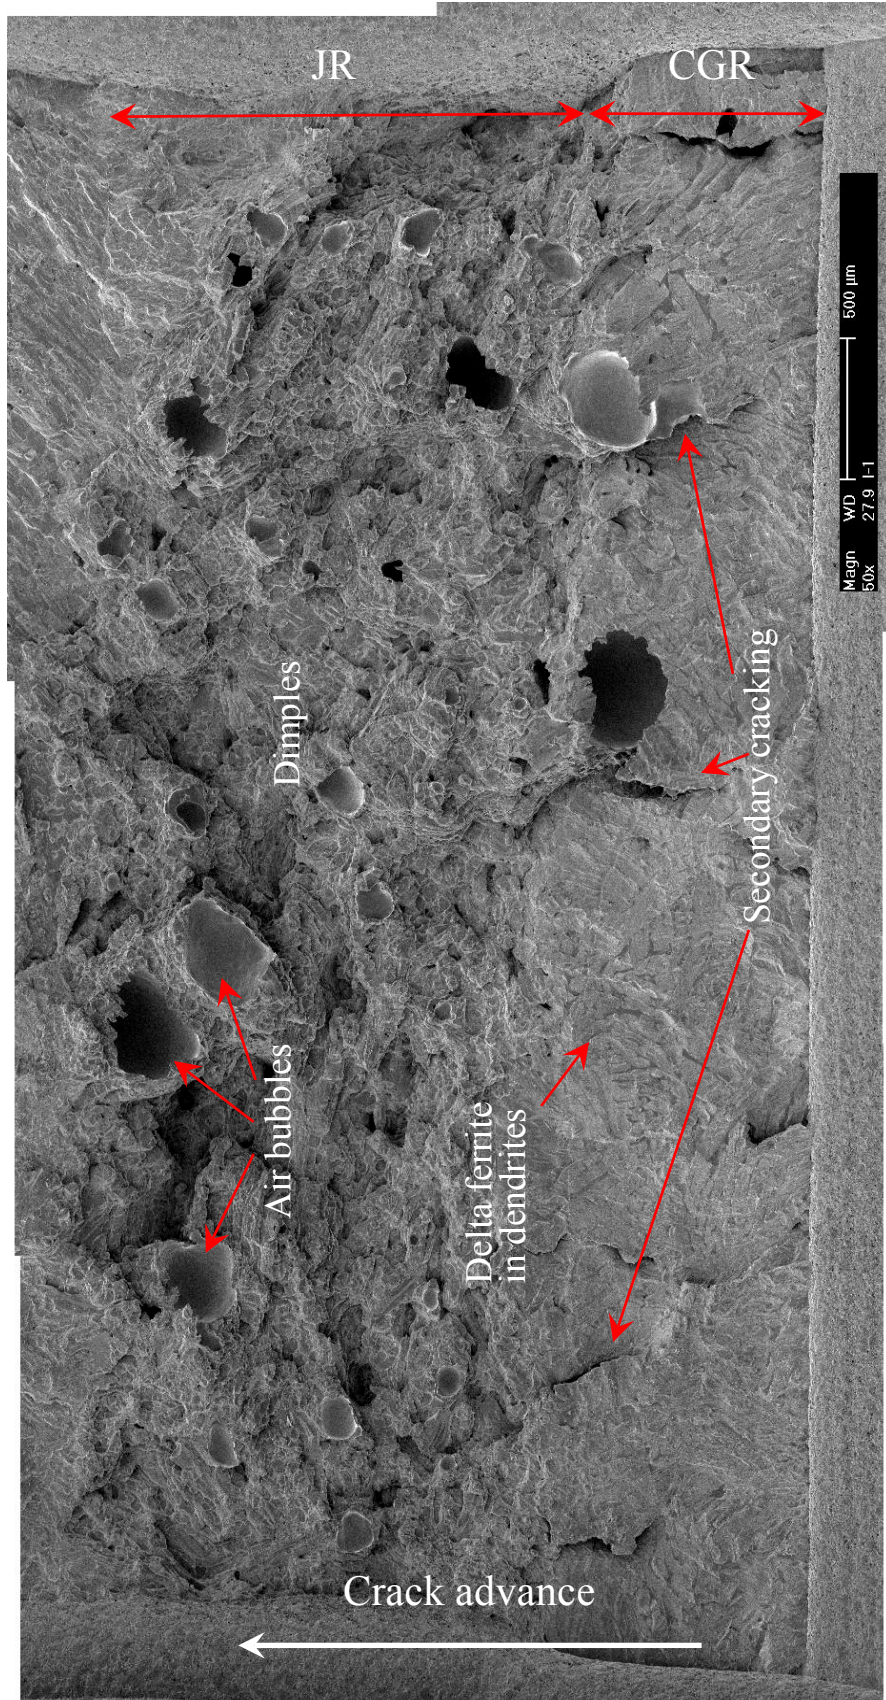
Fracture surface of specimen I-1 tested in low-DO high-purity water.
